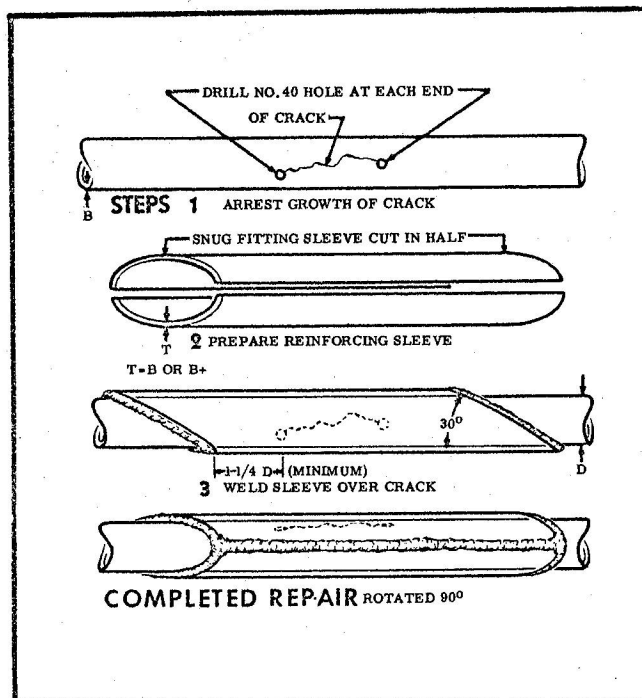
Dent or Crack Reinforcement in Steel Tubing
